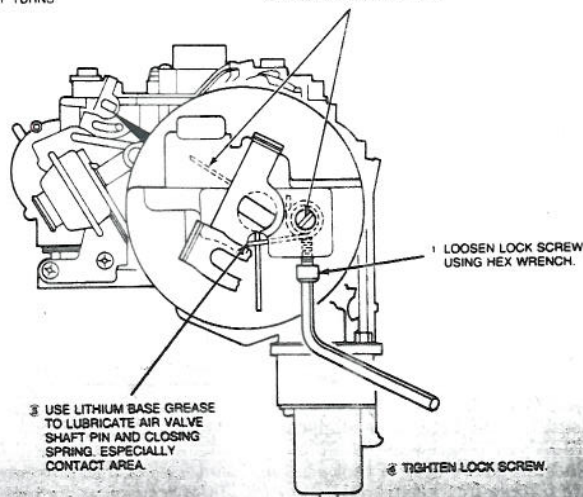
Air valve spring adjustment. 1982-83 E2SE models
